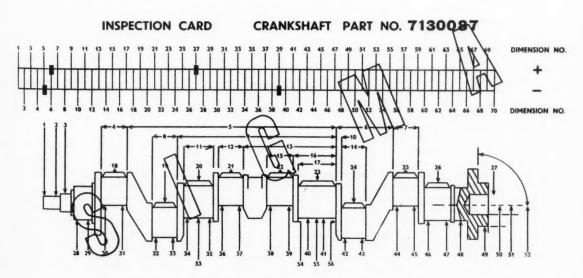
Punched card showing dimensions in error on 6-cylinder crankshaft automatically inspected on 56 dimensions simultaneously.
